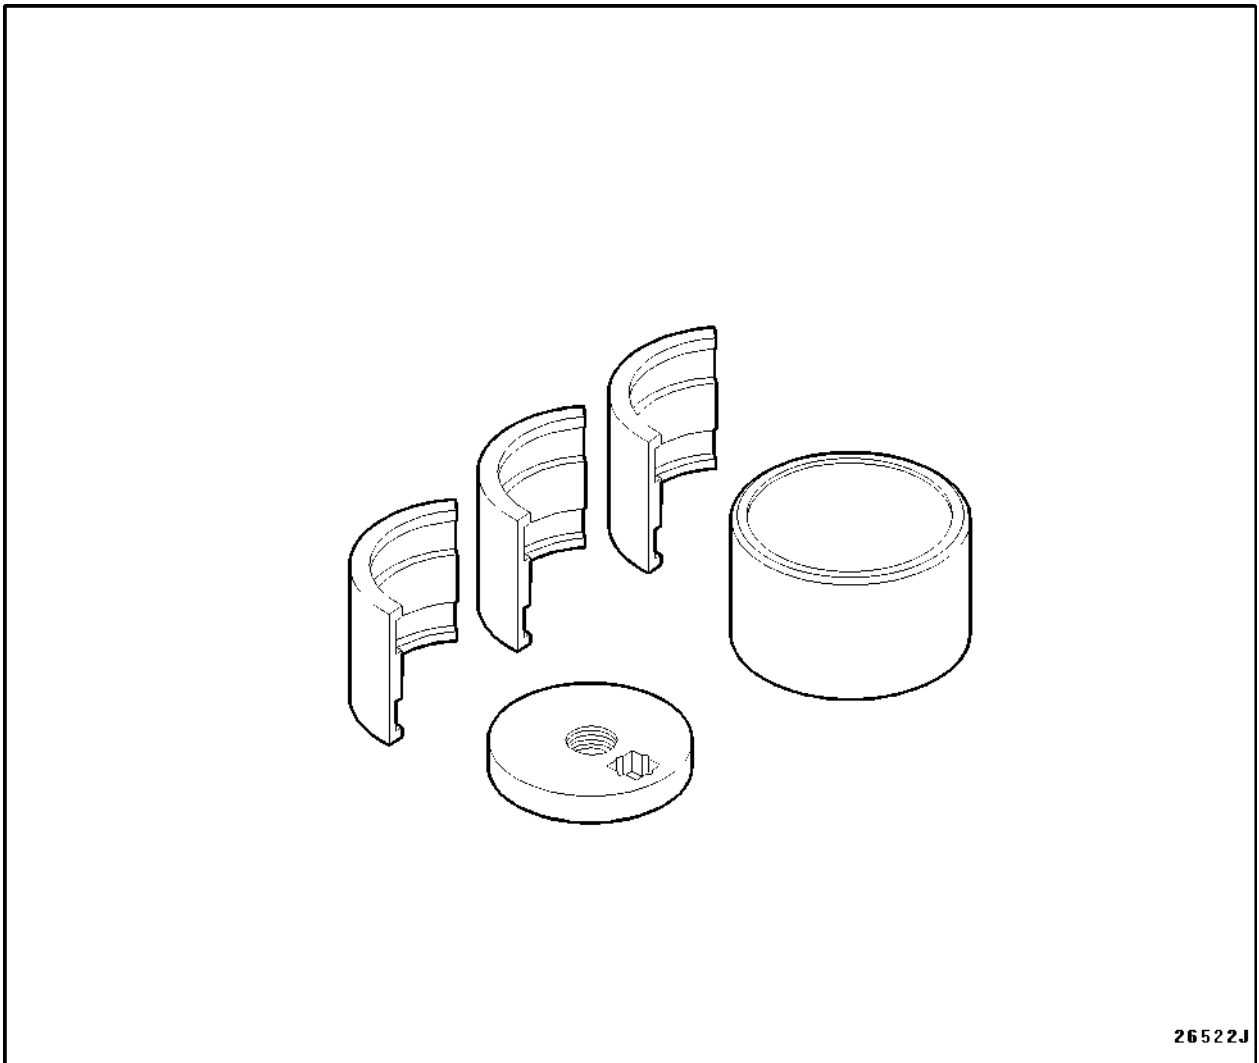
Crank Wear Sleeve Remover,J 41968
